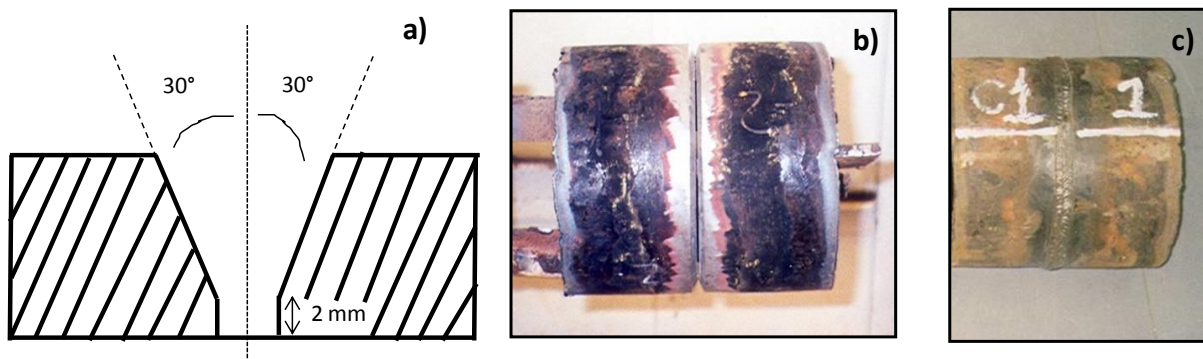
a) Schematic of the V-bevel at 30° , b) notch after been removed the metal to repair and c) piece of pipe after been welded.
